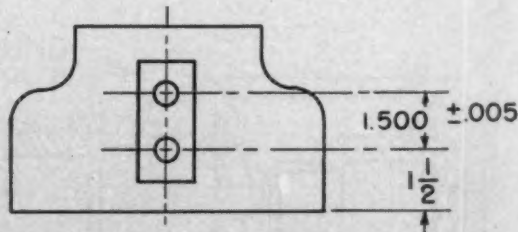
Above — Design showing the general case that is an exception to full base line dimensioning
